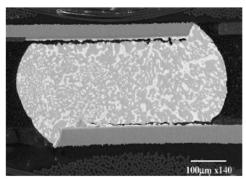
Crack Propagation at the Top and Bottom of a Solder Joint, 15mm BGA [3].
